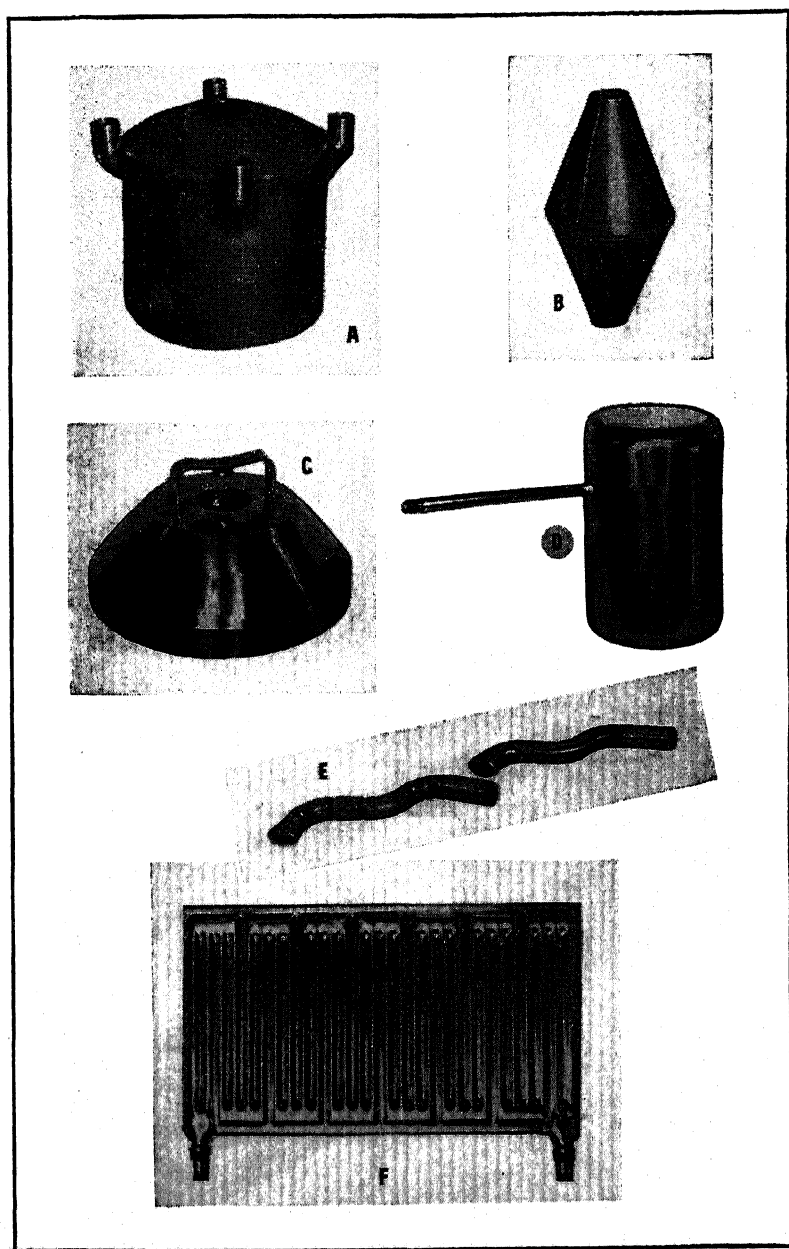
CONTAINERS—(A) Vacuum pan bottom section. (B) Exhaust steam condenser. (C) Stainless steel milk tank float. (D) Stainless steel mercold switch float. (E) Stainless steel ammonia inlet for milk cooler. (F) Stainless steel milk cooler refrigerant section.
